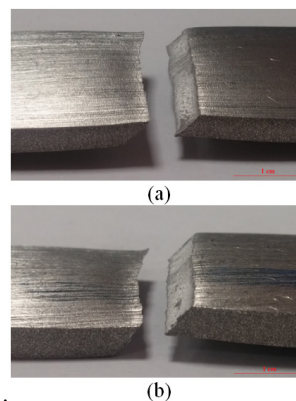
Macro images of the fractured surfaces of the a) Alloy A, b) Alloy B
